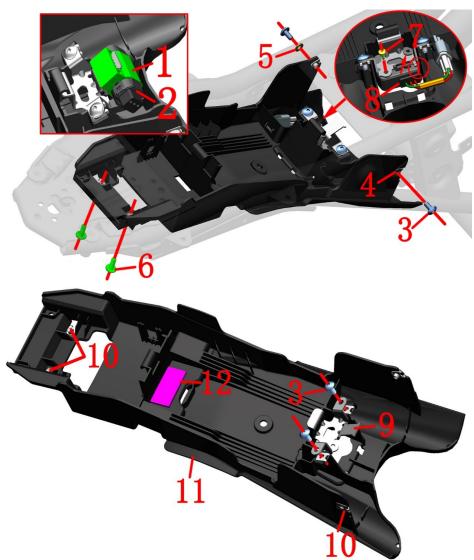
REAR COVER COMPONENT		Electrical device box component 2	CHK	(0)
